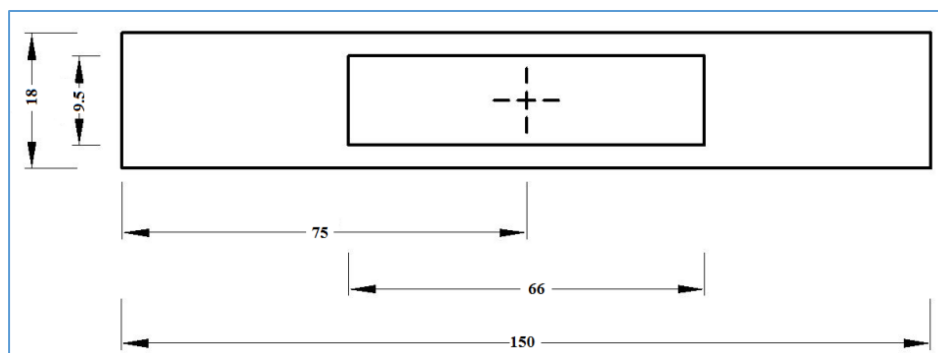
Connector hole centers and dimensions of test specimens (mm).
